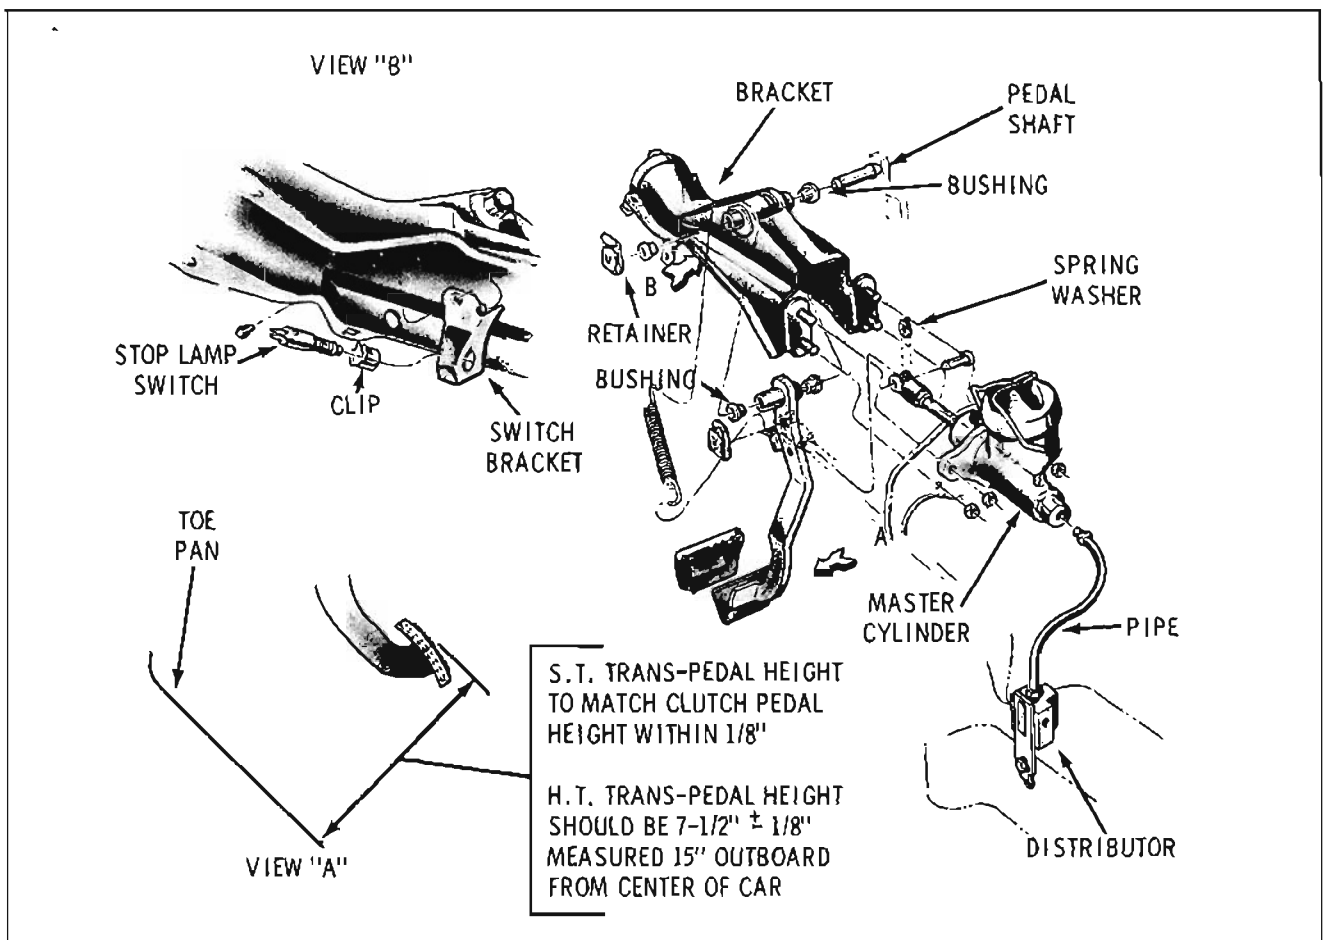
Brake Pedal Adjustment (30, 31 & 32 Series)
